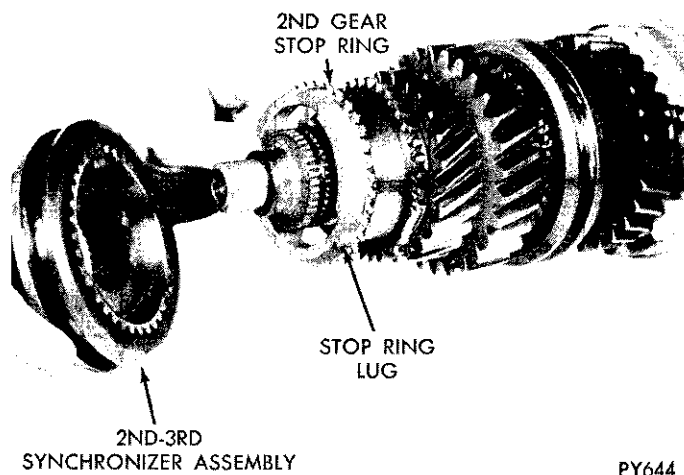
2nd-3rd Synchronizer Assembly and Stop Ring—Removal or Installation
